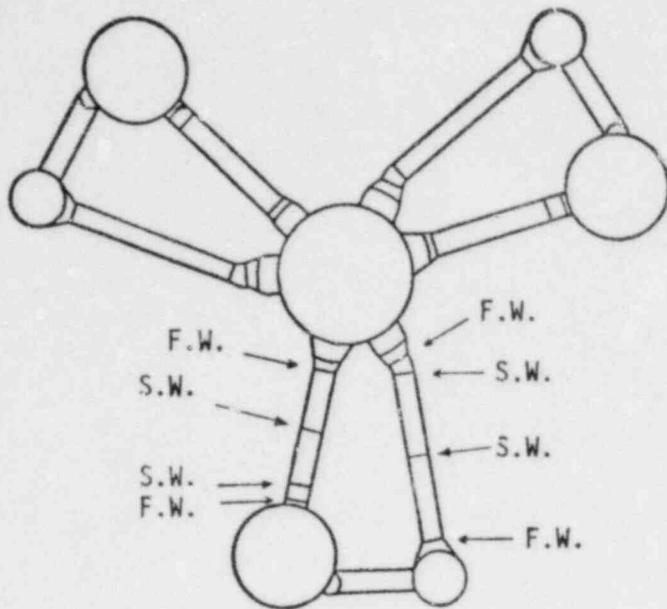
Weld location for Ringhals Unit 2
